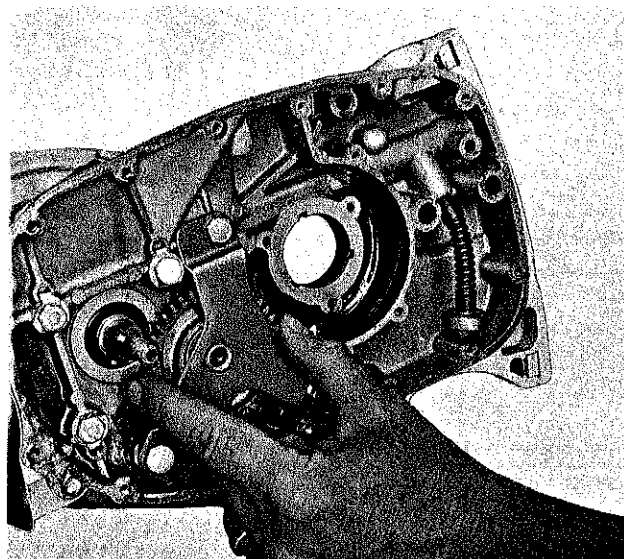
Checking the condition of the idler gear and yoke assembly. This assembly must be replaced as a complete unit if any part requires replacement. Check the teeth on the gear for wear or breaks, and look for looseness of the yoke shaft.
